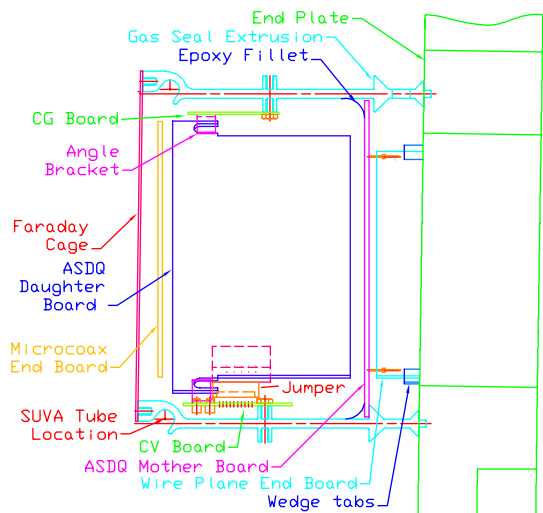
Side view of the gas seal and readout components. With the exception of the Faraday Cage, the components are rectilinearly related to the x-y plane and not the loaded End Plate, shown here at SL8.
